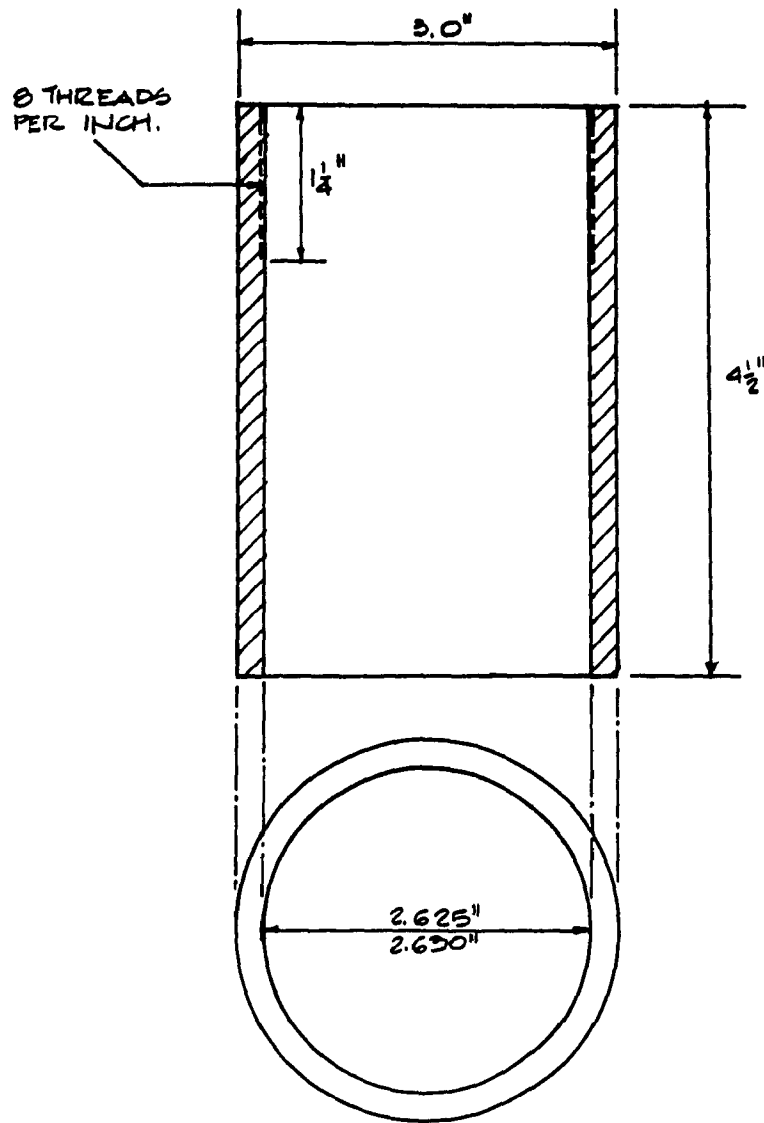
Steel Pipe Section (Part No. 14; Fig A 4.13)
